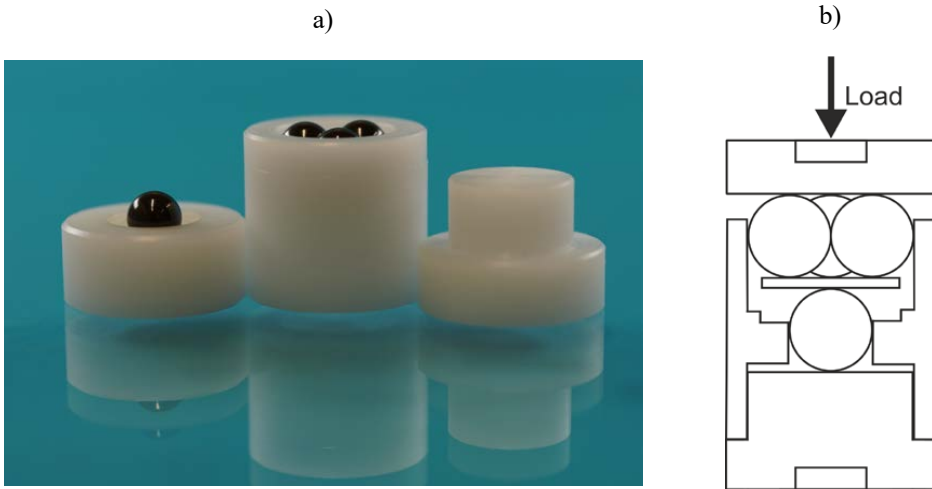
The components of the testing fixture are shown in a), with the top stamp, guide and bottom stamp from left to right, as well as the Si₃N₄-balls for load application. A schematic of the assembly of these components, loaded with a specimen, is given in b).
